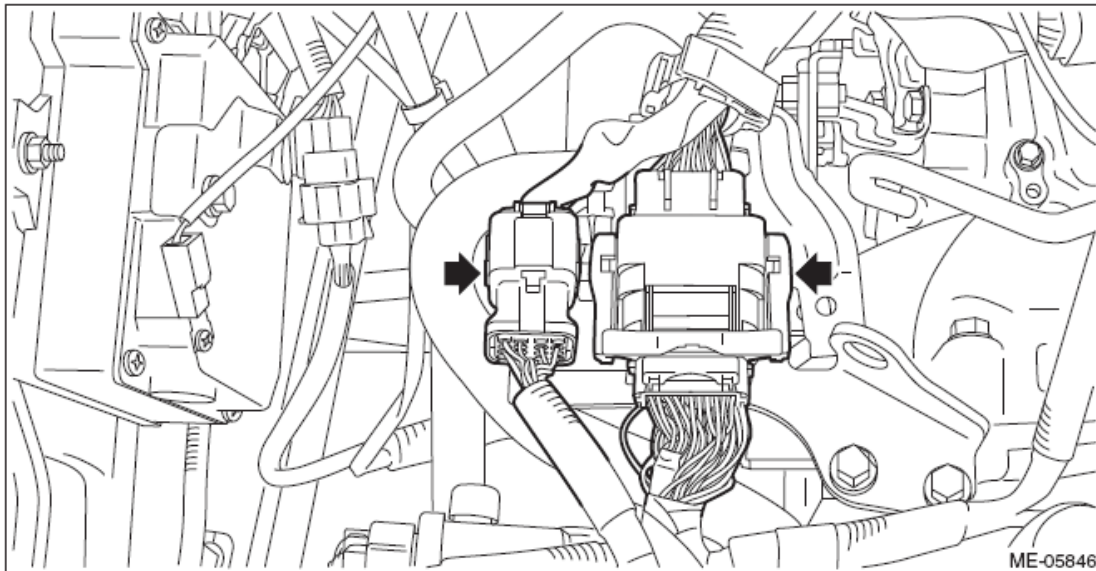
Connecting Bulkhead Harness Connector To Engine Harness Connector
